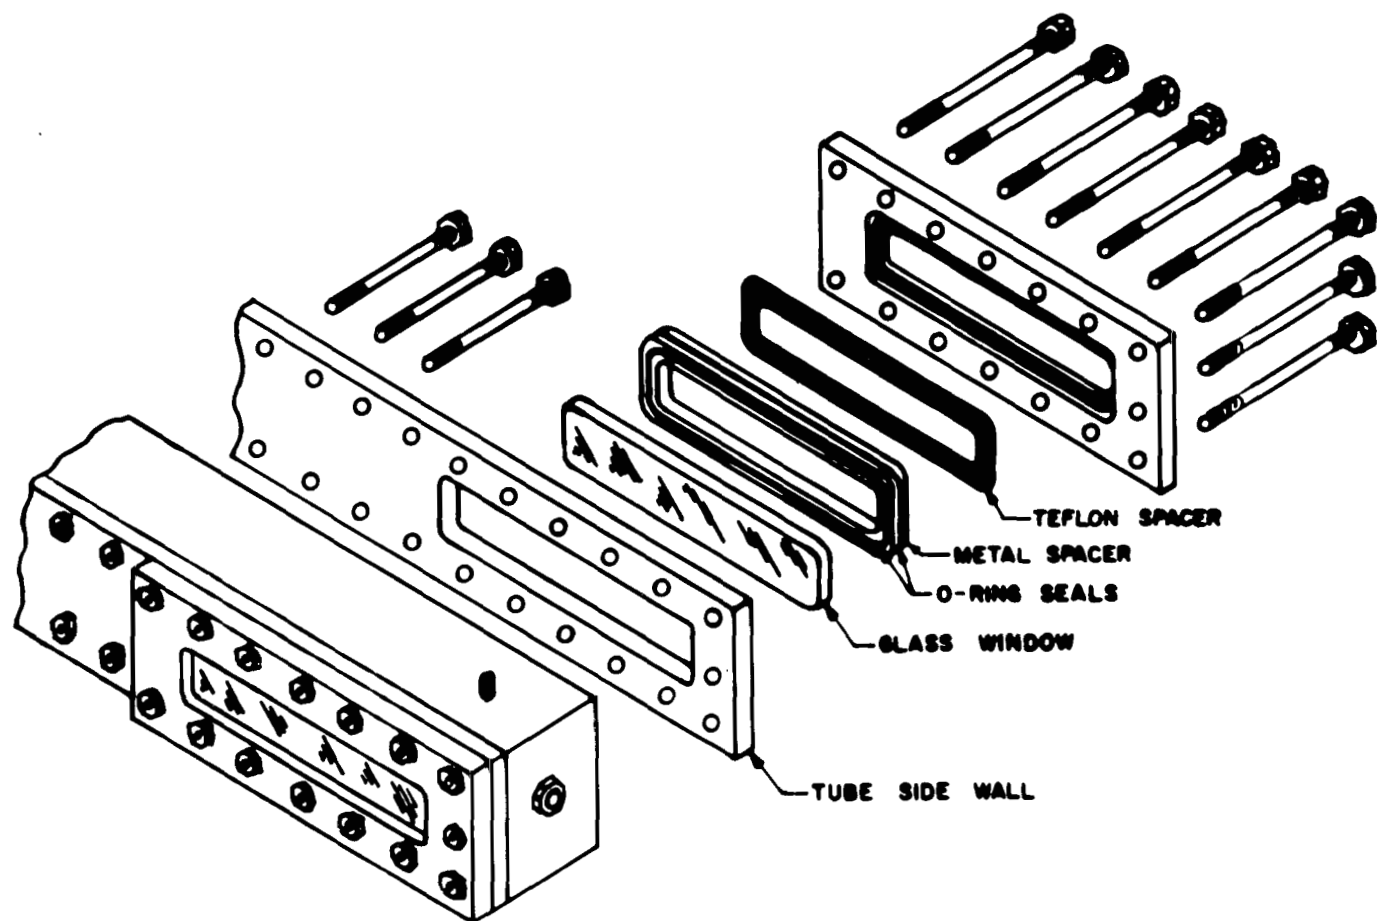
EXPLODED VIEW OF DETONATION-TUBE WINDOW
